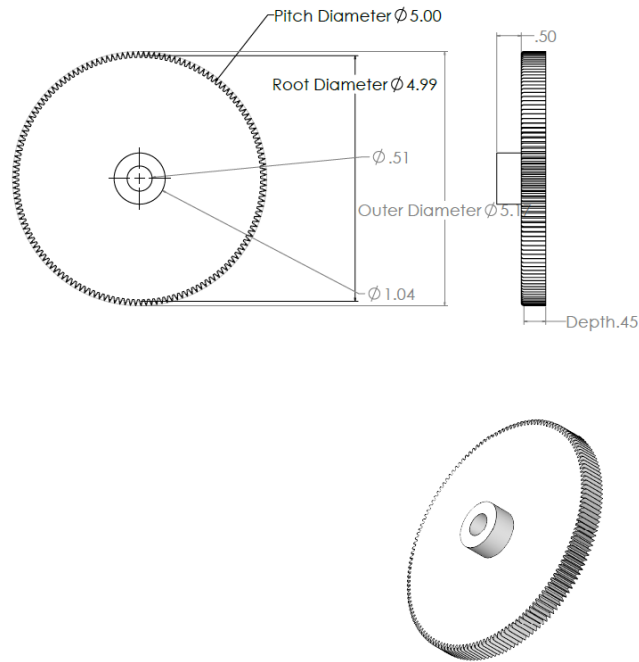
CAD drawing for the driven gear attached to the reflector microphone assembly using a press-fit (units: inch)
